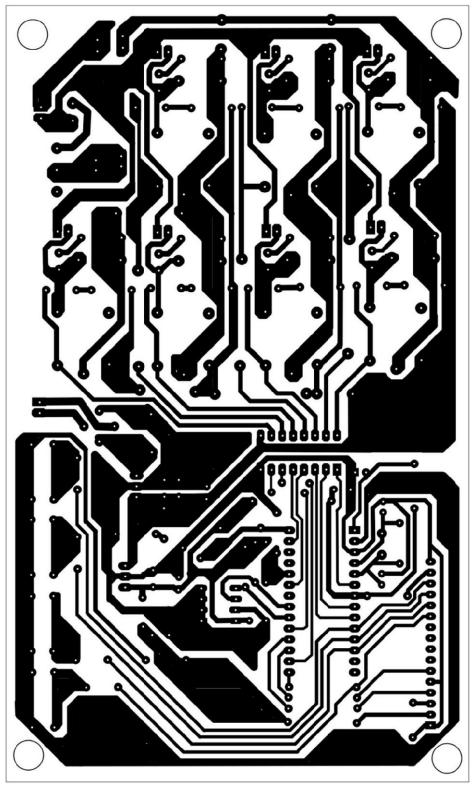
An actual-size, single-side PCB layout for the beverage vending machine controller
